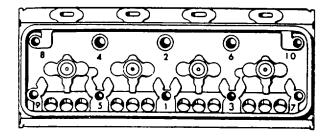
Cylinder Head Bolt Tightening Sequence.
